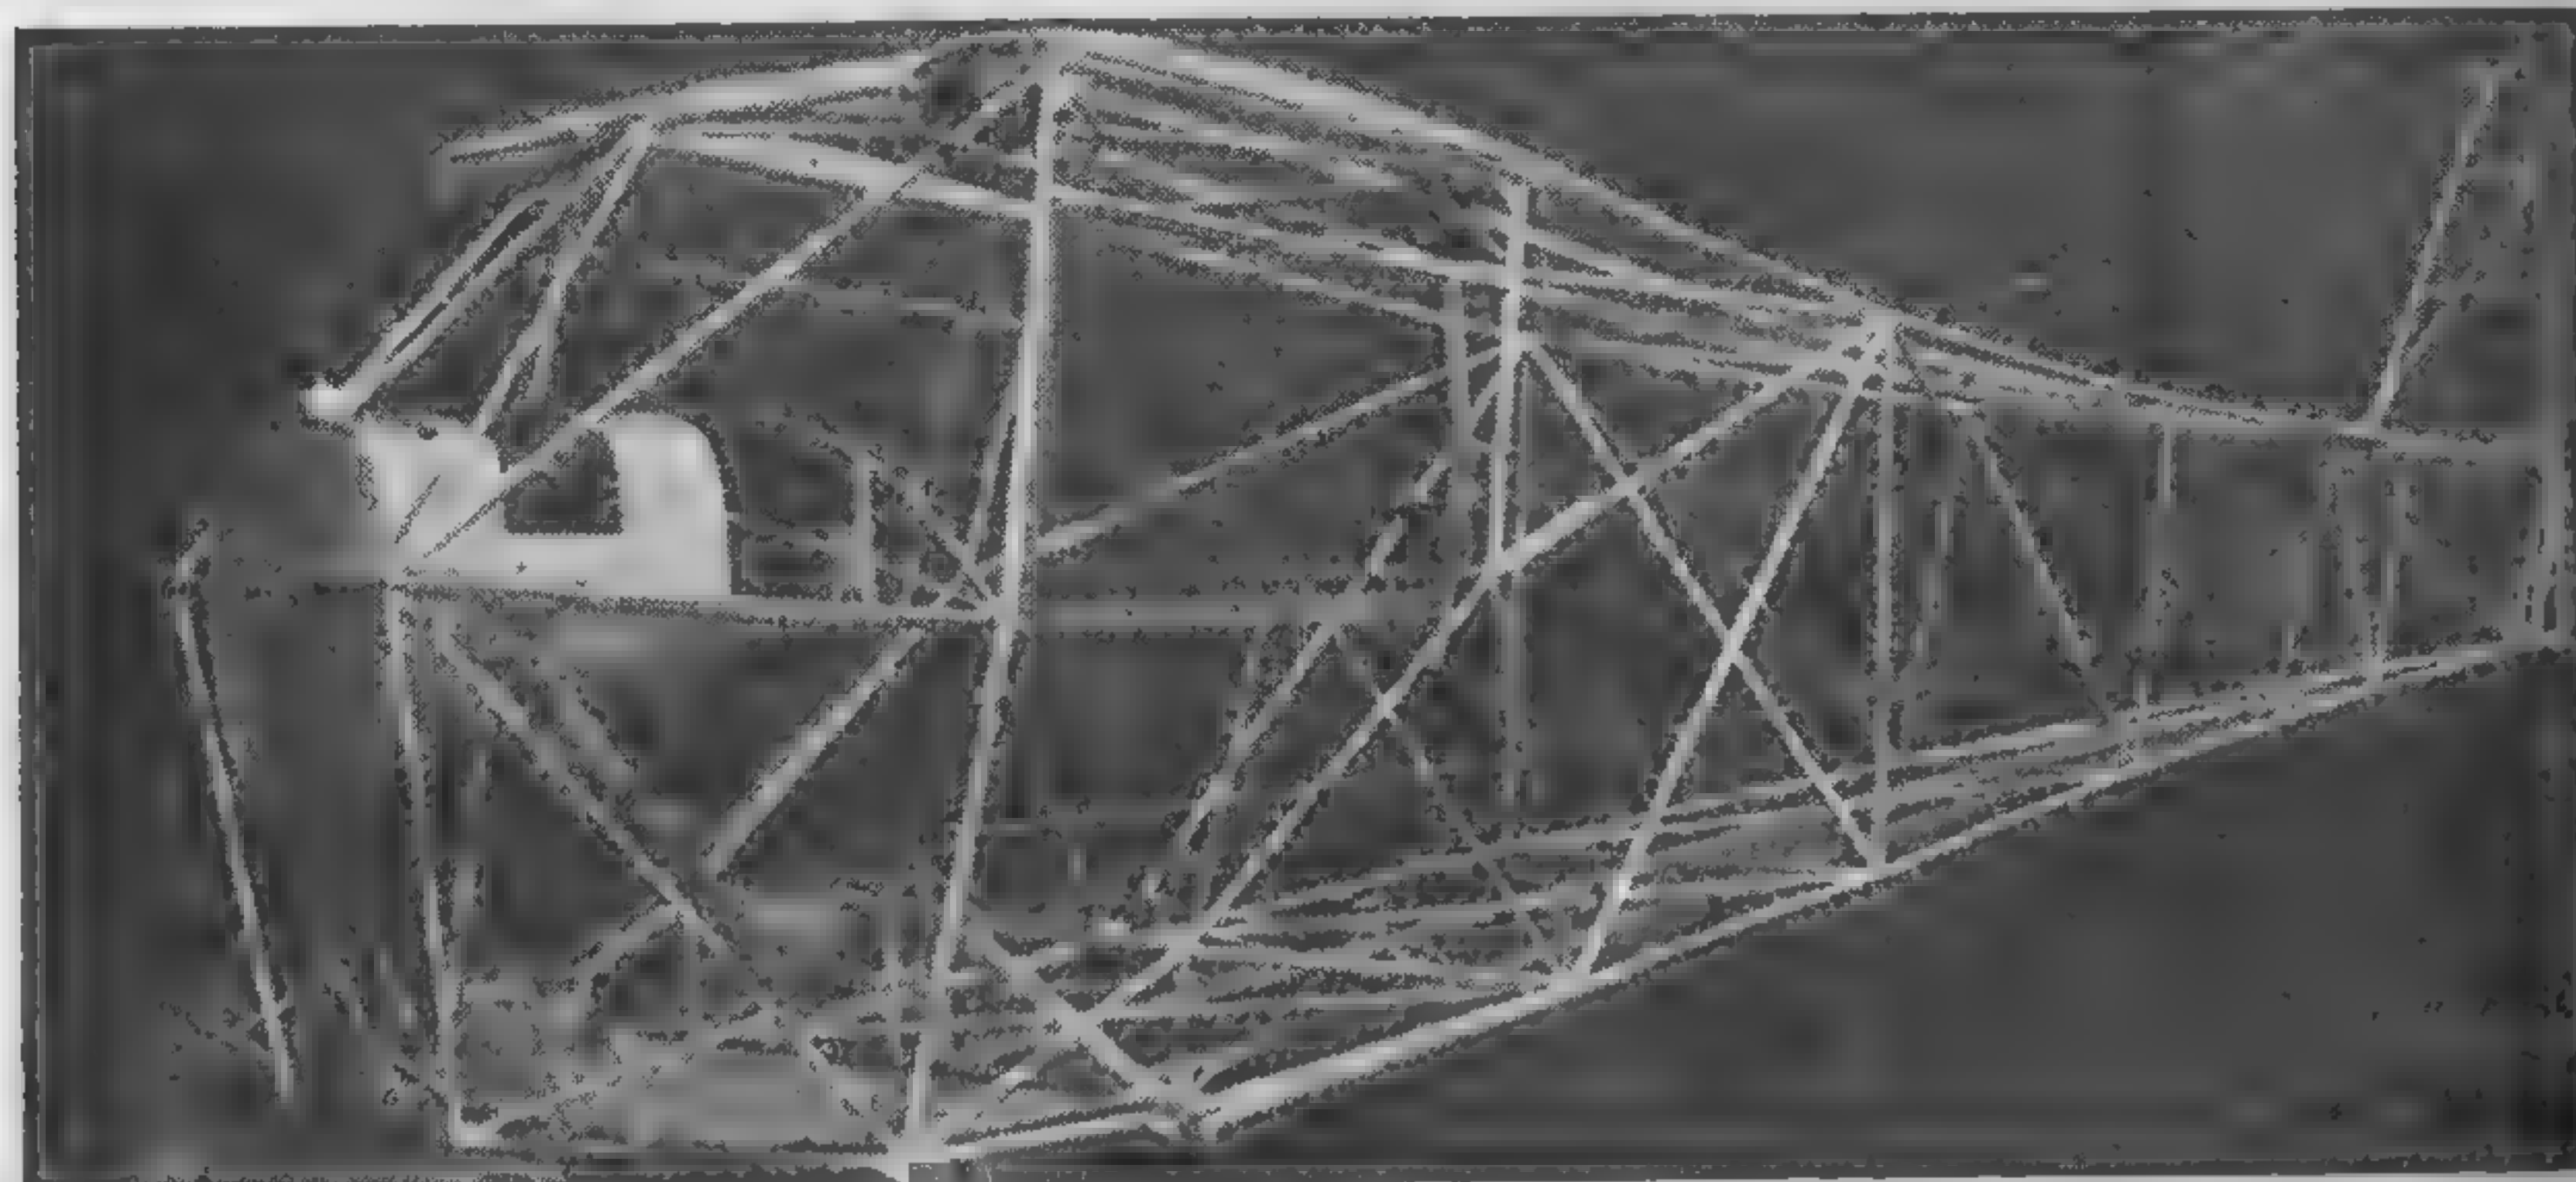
Taylorcraft Metal Tube Fuselage. Scientifically-braced Seamless Steel Tubes Are Welded into a Four-Longeron Fuselage
